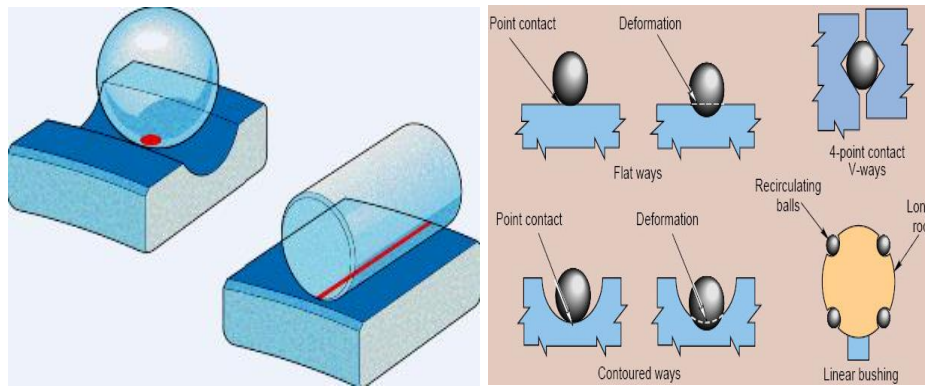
Contacts examples for sphere, cylinder and ball bearing (machine design, 2014)
